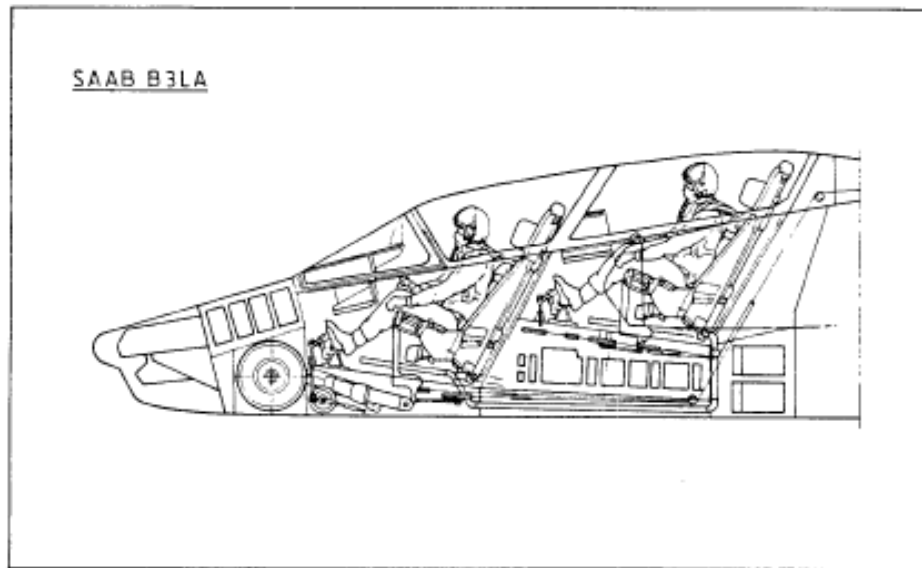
Cockpit Layout and Inboard Profile: SAAB B3LA
